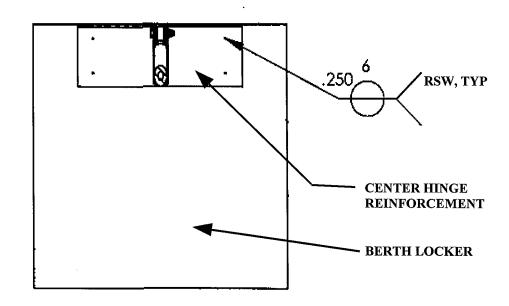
CENTER HINGE REINFORCEMENT INSTALLATION
